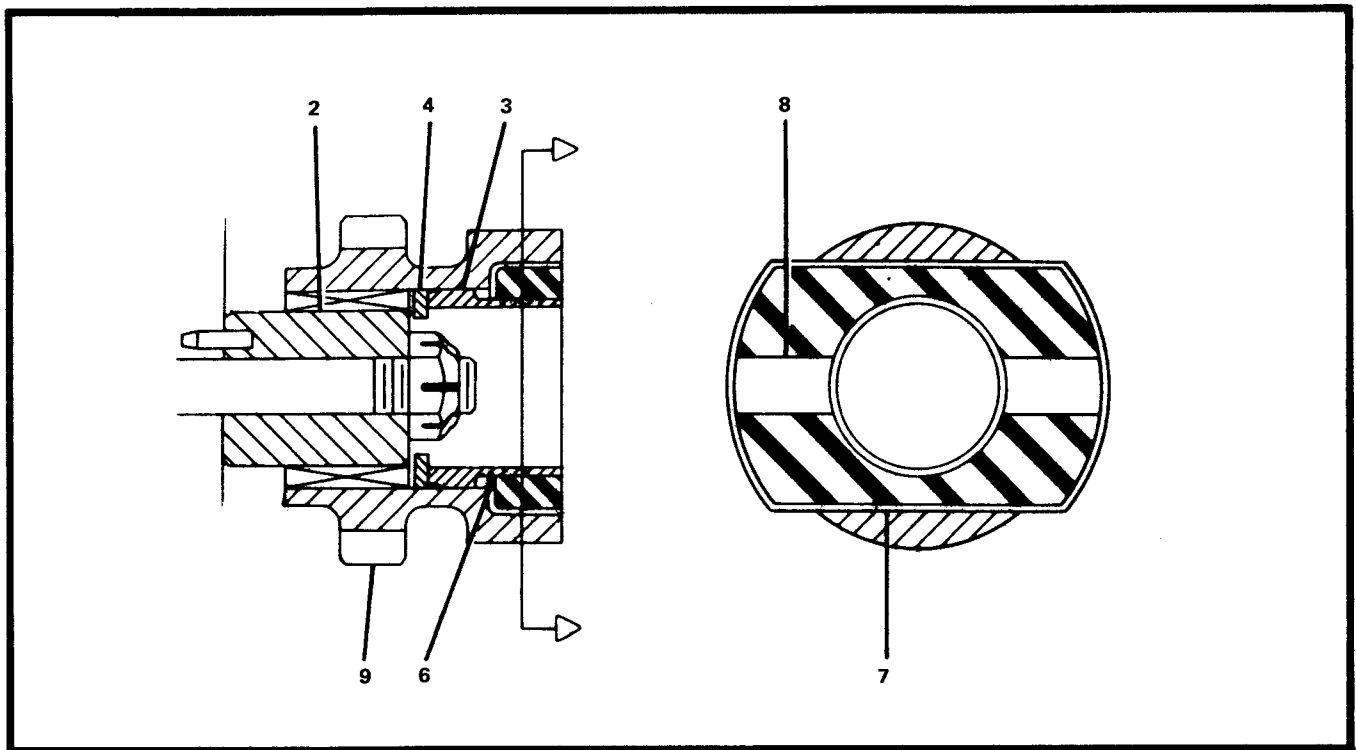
Magneto Drive Assembly Limits (Refer to Table VI).
